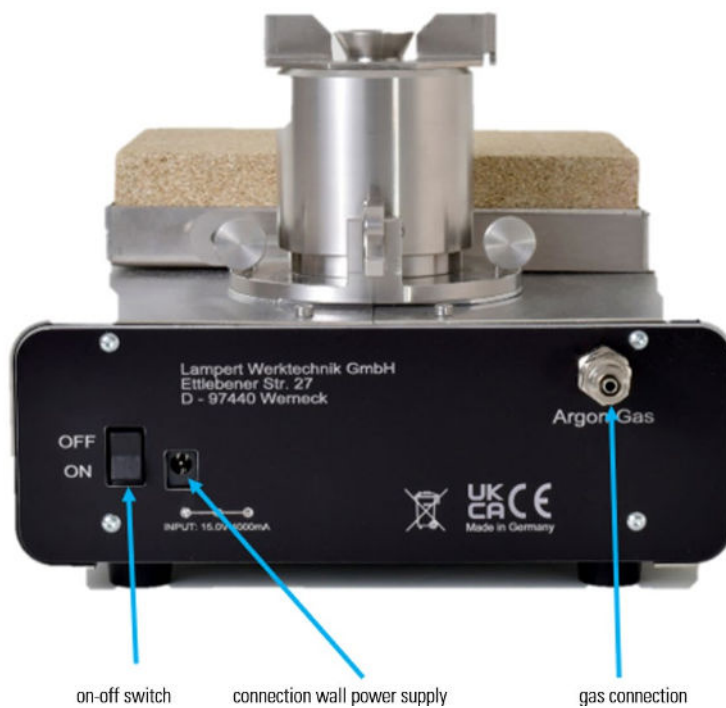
Rear view of the FUSION casting centrifuge with connections and control elements
